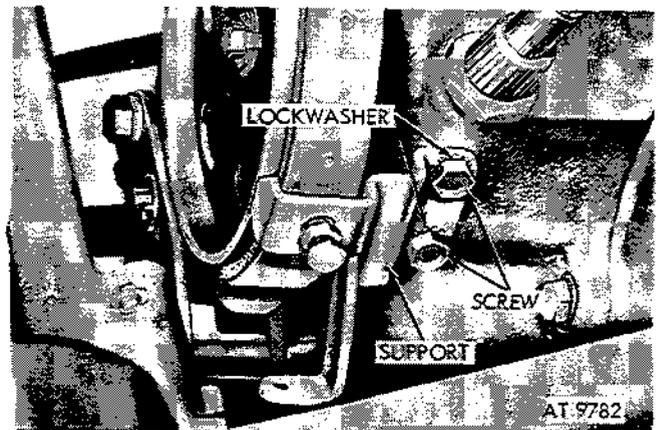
Remove Band-aligning screw support assembly from transfer.
